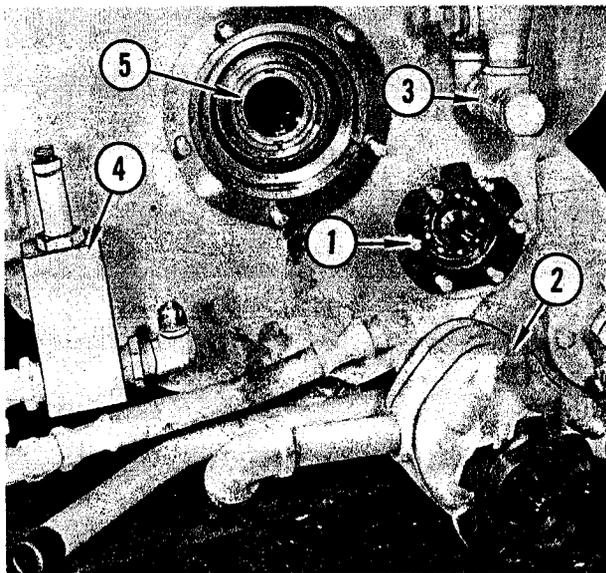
PUMP AND REACTOR SLEEVE REMOVAL
